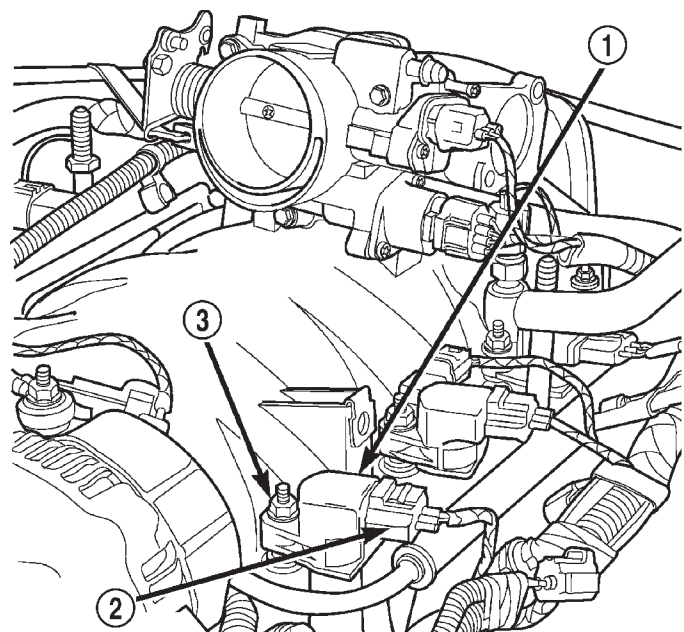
Ignition Coil Location—4.7L V-8 Engine
